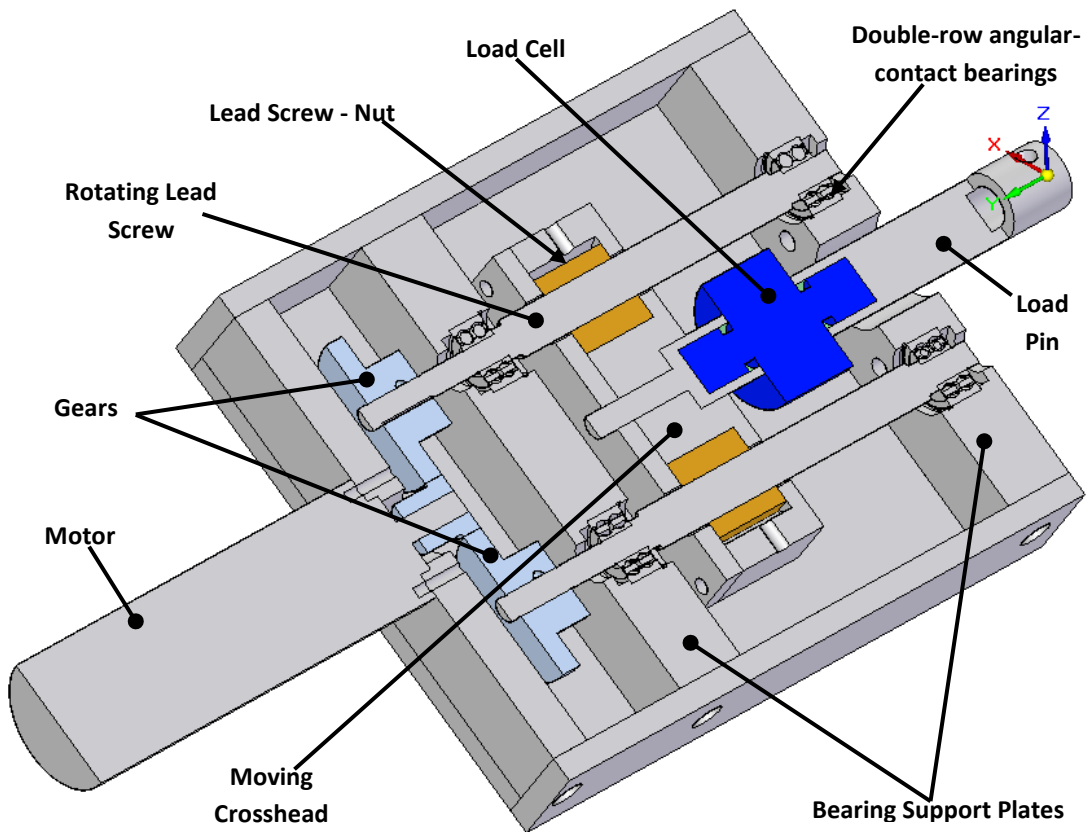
Cross-section of the final CAD assembly model for the miniature tensile machine showing the main components.
